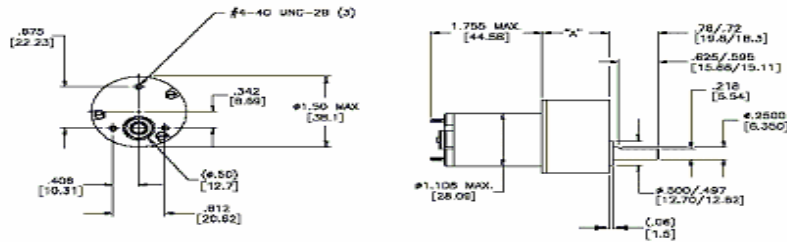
Dimensions of the Motor used for Gripper Actuation
